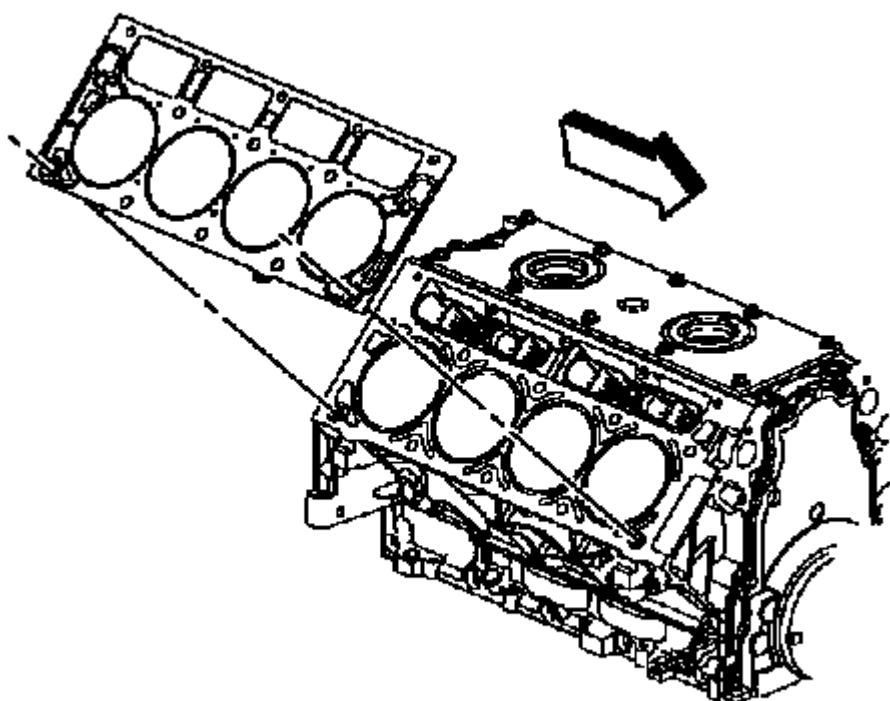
View Of Right Cylinder Head Gasket And Alignment Pins
